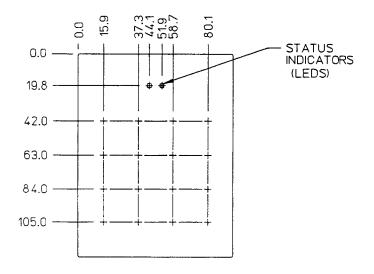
MODULE FRONT 16 COMPONENT GRIDWORK, 2 SLOT MODULE
